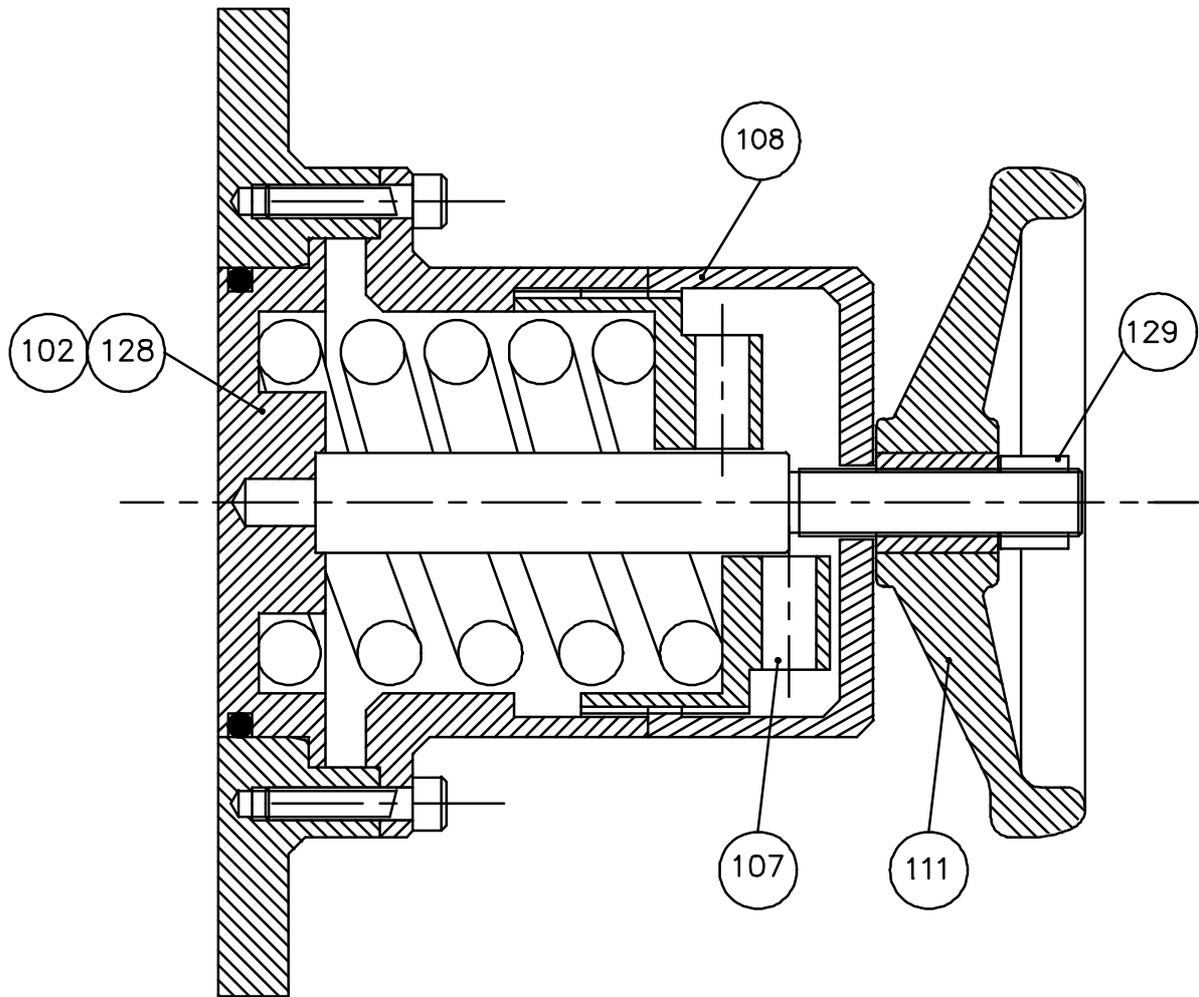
Spring Loaded Integral Pressure Relief Valve OL4 (S4) Typical.
